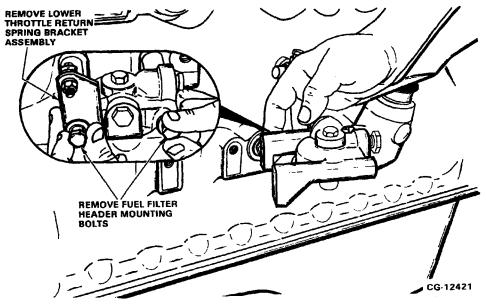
Remove Fuel Filter Header and Lower Throttle Return Spring Bracket Assembly (Current Production Shown)
